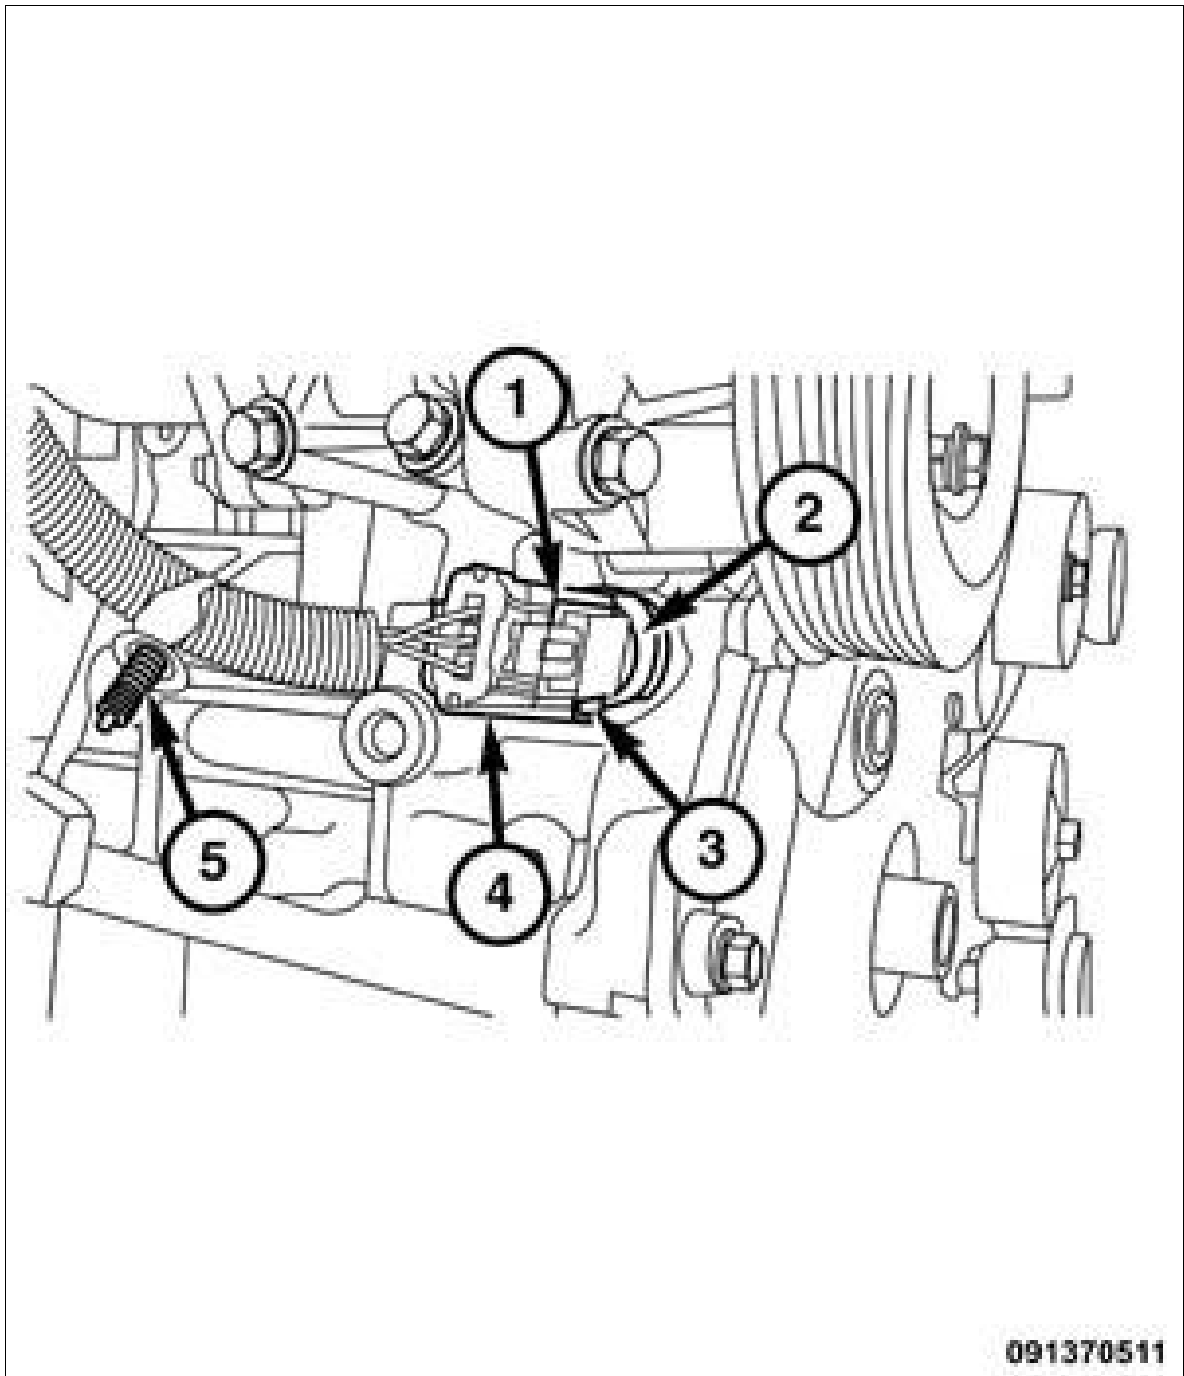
Crankshaft Position (CKP) Sensor, Wire Harness Connector & Bolt
